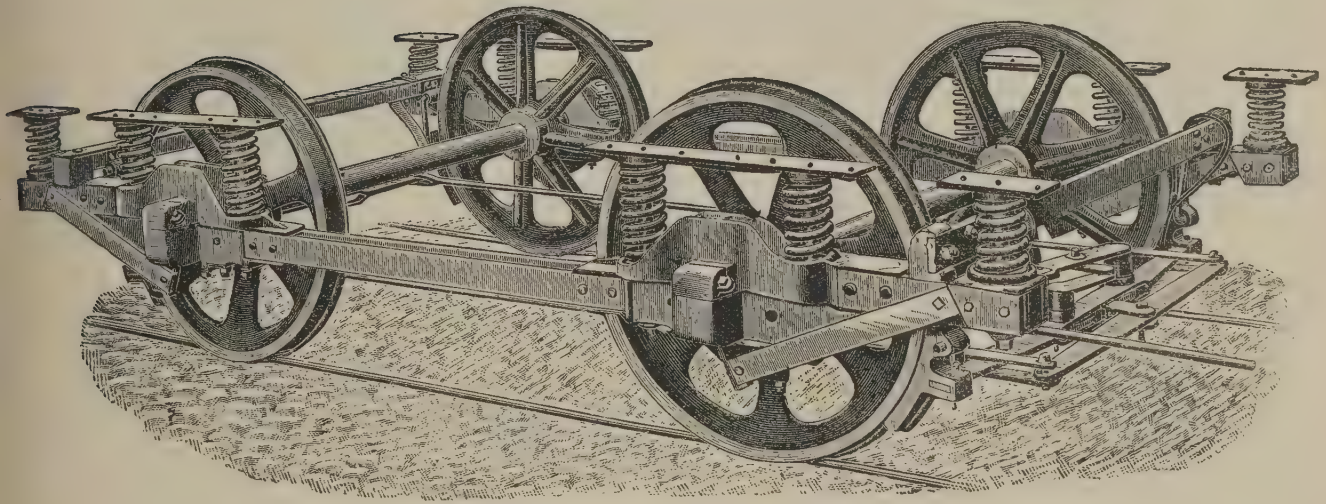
DÖRNER & DUTTON'S IMPROVED MOTOR TRUCK.
